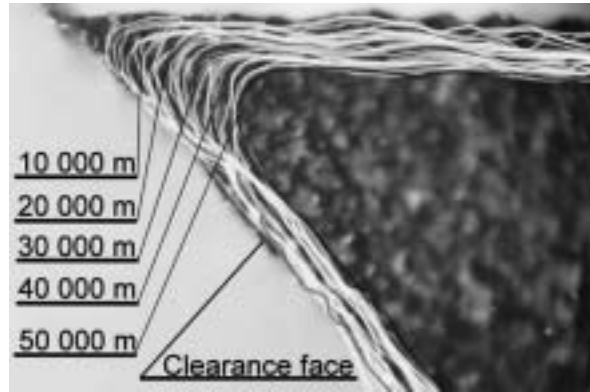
Tool wear of the cutting wedge at the clearance $p = 50$ mm
